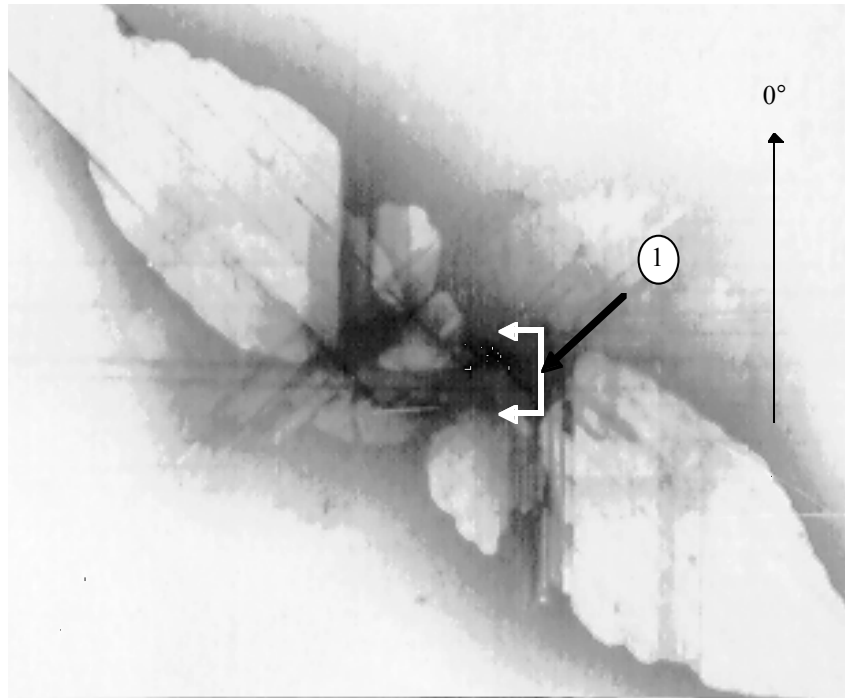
Cross-section of specimen # 12/12C, cut 1.
